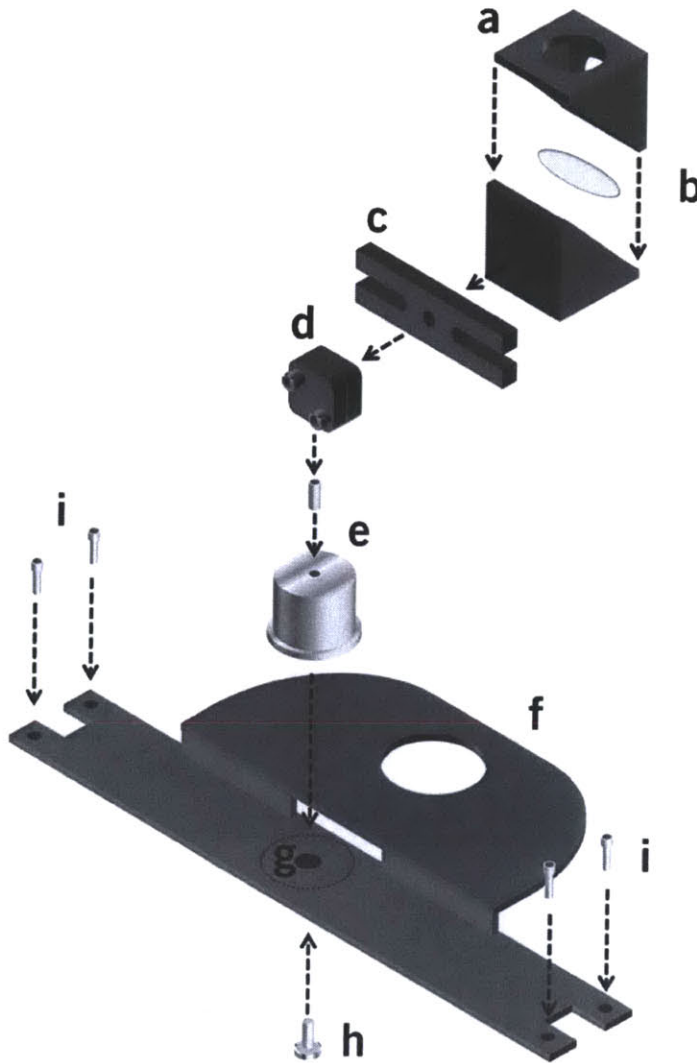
An exploded view of the dichroic mounting adapter. (a-b) (a) The dichroic mounting adapter is composed of a metal filter cube, which contains an infrared (IR) dichroic mirror (b). (c) The filter cube is attached to a BA1 standard base using glue. (d) The opposite face of the BA1 standard base attaches to a two-axis compact kinematic mount also using glue. (e) The compact kinematic mount is attached to a $\text{\O}1''$ (1'') pedestal pillar post with a #8-32 \times 1/4" set screw. (f) The assembly comprising components a-e mounts to a Nikon adapter plate from a 70 mm stage-up kit so that the dichroic mirror sits in the beam path. (g-h) (g) This is accomplished by drilling a hole and using a #8-32 \times 1/4" screw (h) to position the dichroic mirror over the opening in the adapter plate. (i) The entire assembly is affixed to the microscope using screws included in the 70 mm stage-up kit. Figure A-1 shows the location of the dichroic mounting adapter on the microscope.
